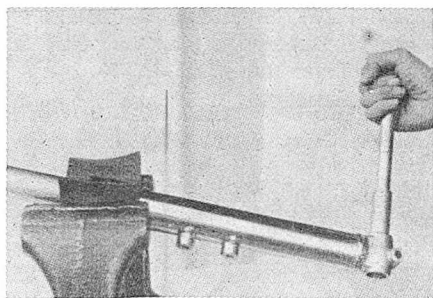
Hold outer tube nut in a vise and turn the outer tube to disassemble.
